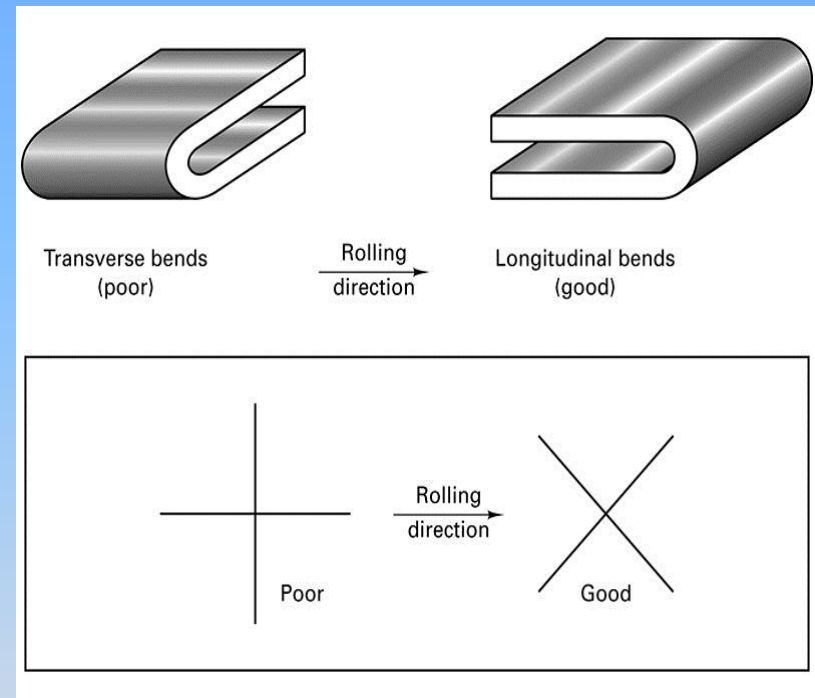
Bends should be made with the bend axis perpendicular to the rolling direction. When intersecting bends are made, both should be at an angle to the rolling direction, as shown.
